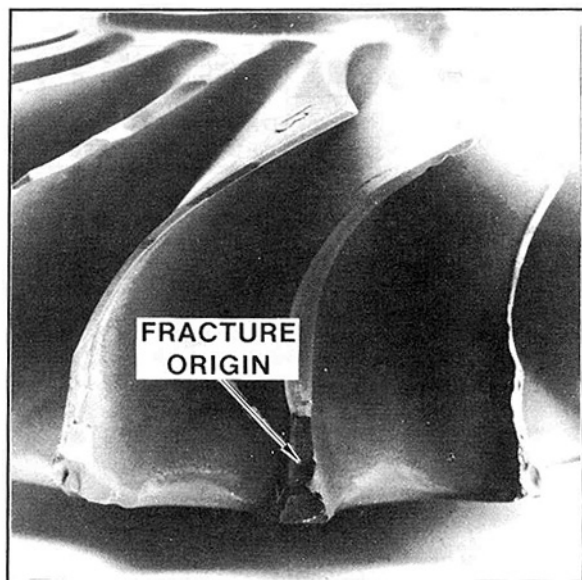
Turbine inducer blade fractures during engine operation
